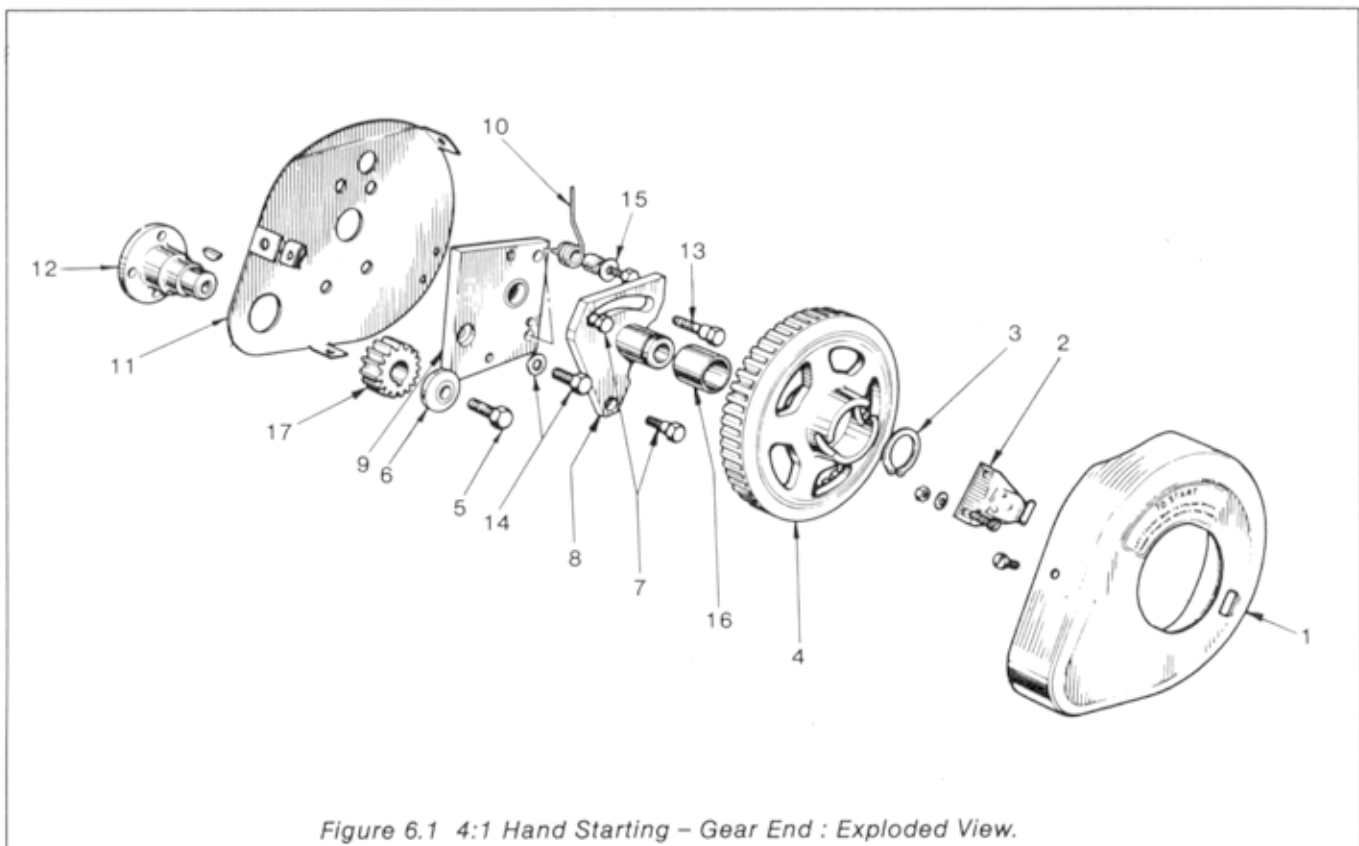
4:1 Hand Starting – Gear End : Exploded View.
